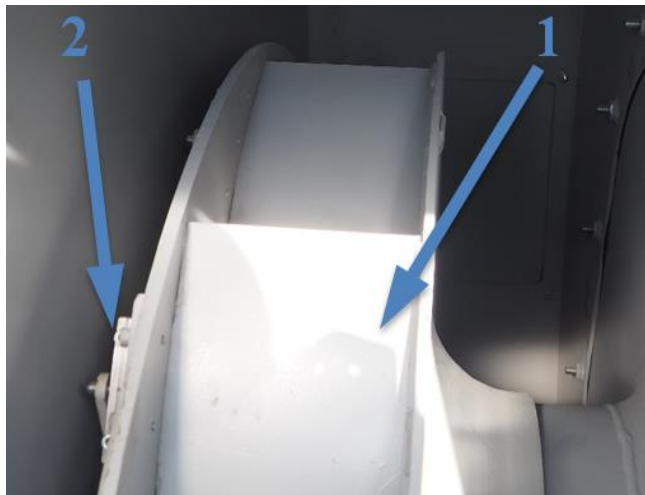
Prototype of the centrifugal fan impeller with adjusting mechanism
